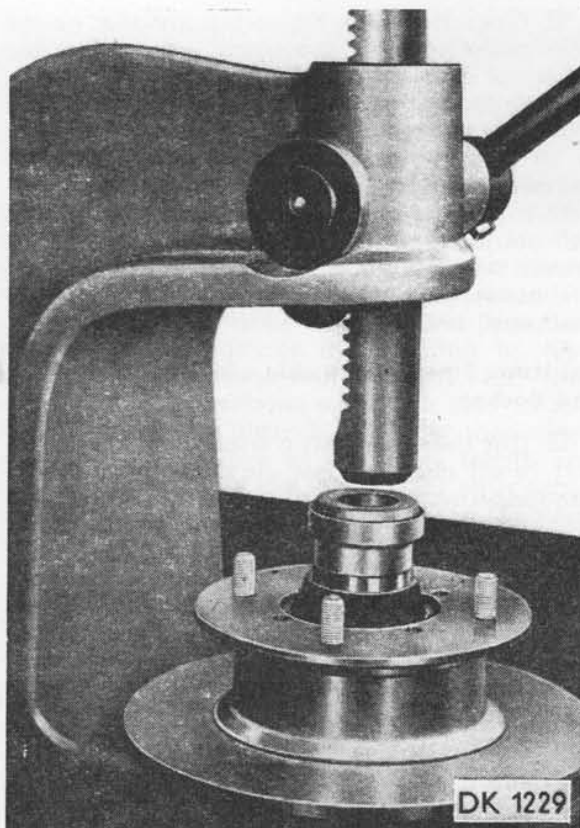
/5 - Pressing-in Bearing Cups Using MP 6-130 Jig
